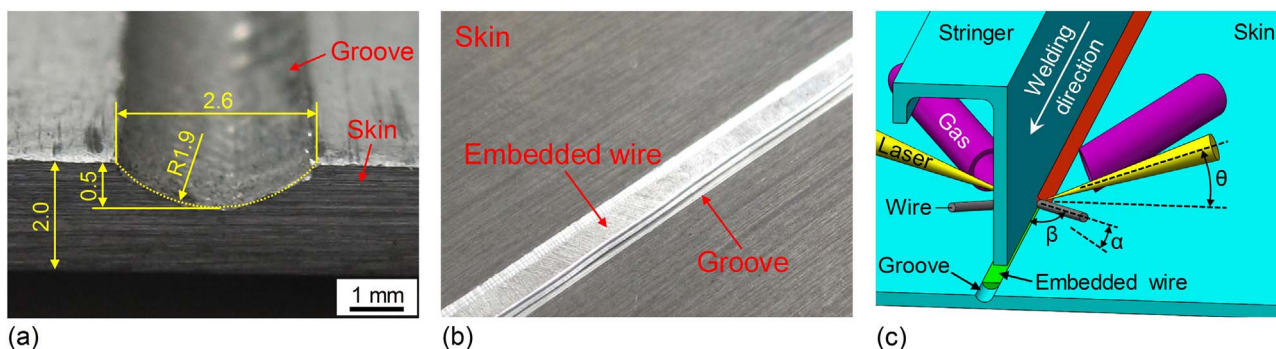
Physical dimensions of the arc groove (a); embedded wire inside the groove (b) and used configuration for the skin embedded wire double-sided LBW of T-joints (c).
